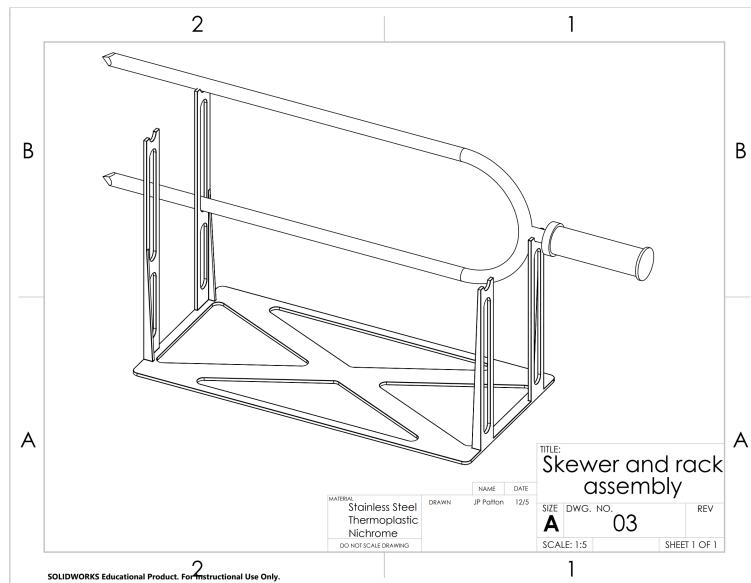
Drawing Demonstrating the mounting of the skewers on the rack
